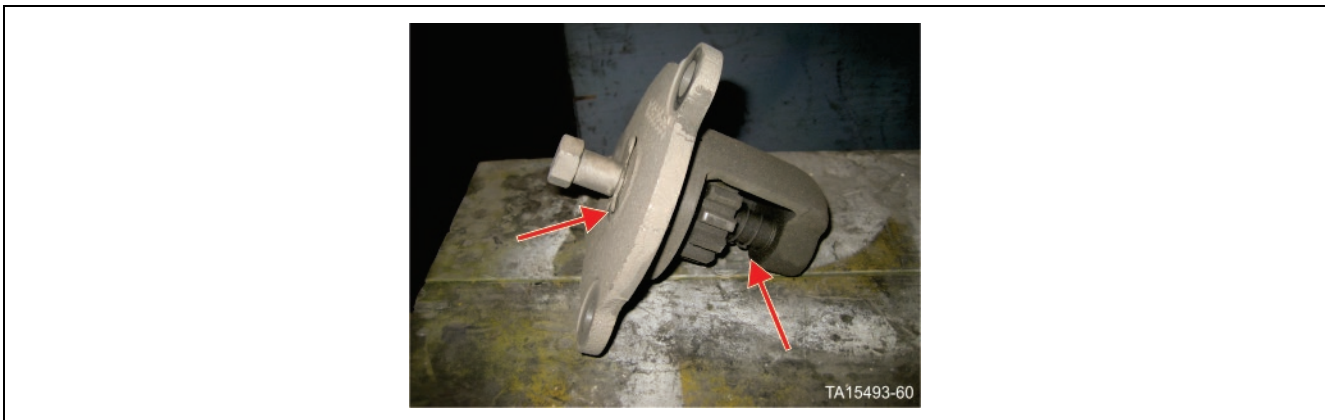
Cummins Engine Rotation Tool - Retainer and Spring
